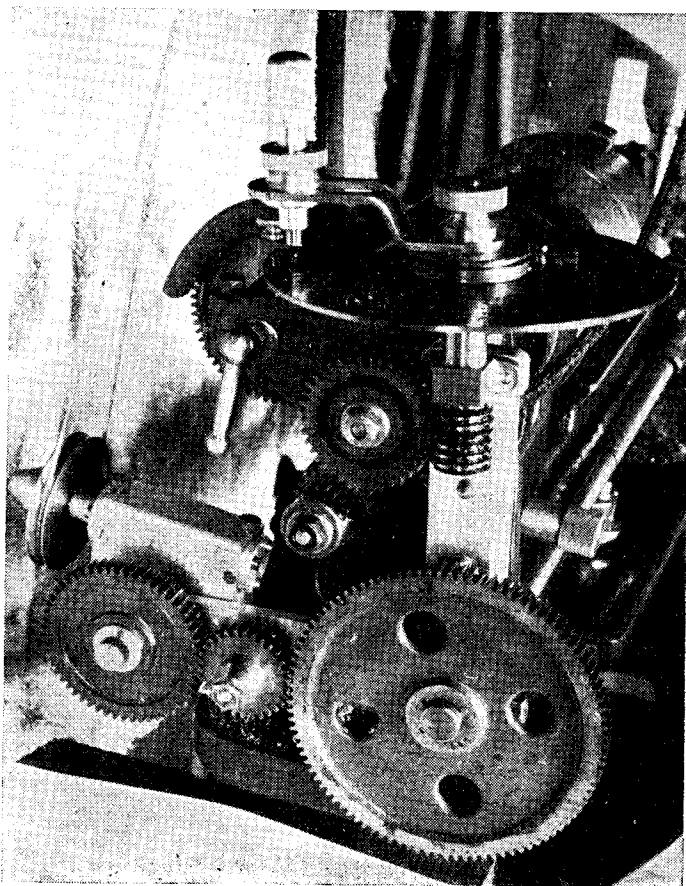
The mandrel dividing-head and the worm-drive attachment for driving the lead screw
